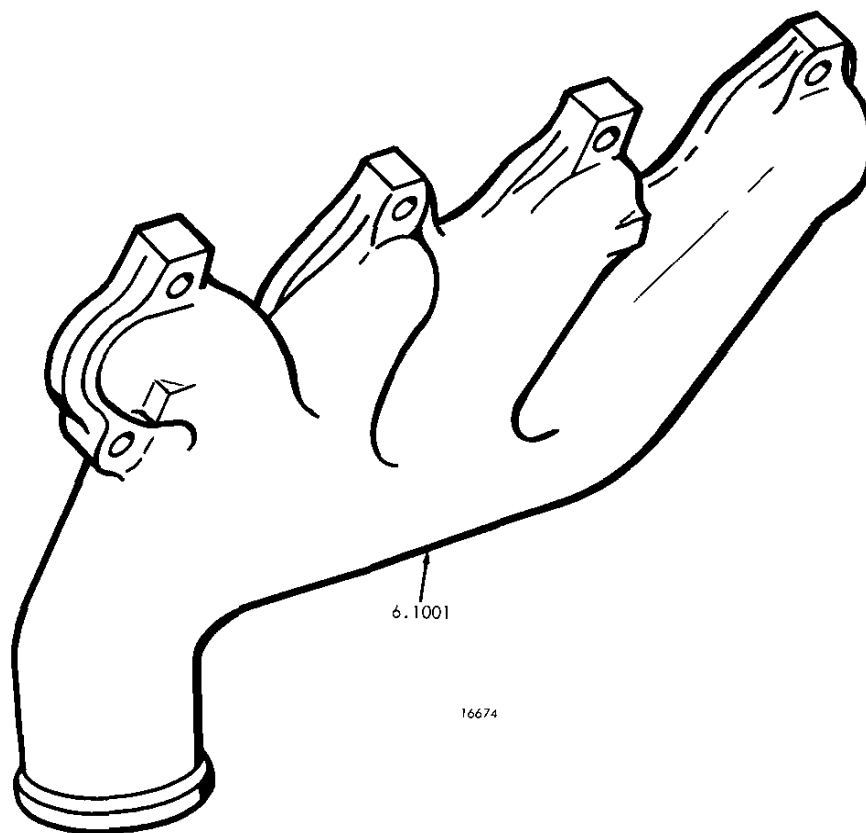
C EXHAUST MANIFOLD (end outlet, right & left bank)
